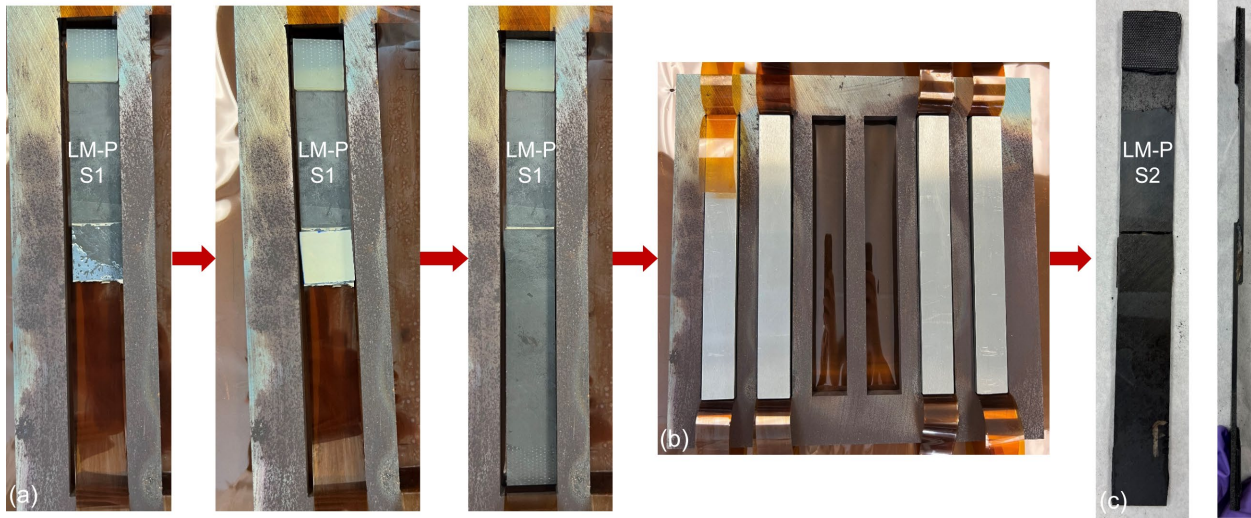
Reassembly of SLS specimens. (a) Addition of new LM-PAEK film interlayer. (b) Addition of platens for pressing. (c) Reformed joint after pressing.
